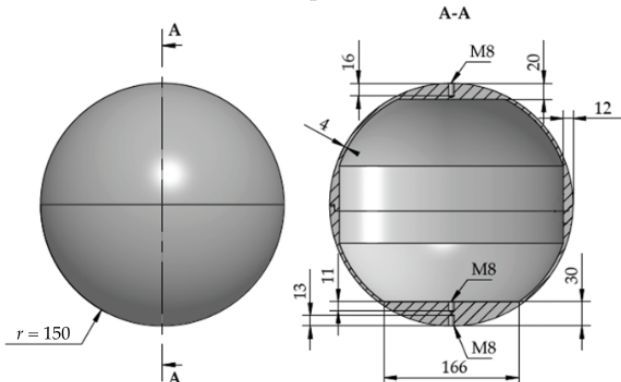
Technical drawing of the sphere. Measurements in mm. Refer to [1] for further details.
